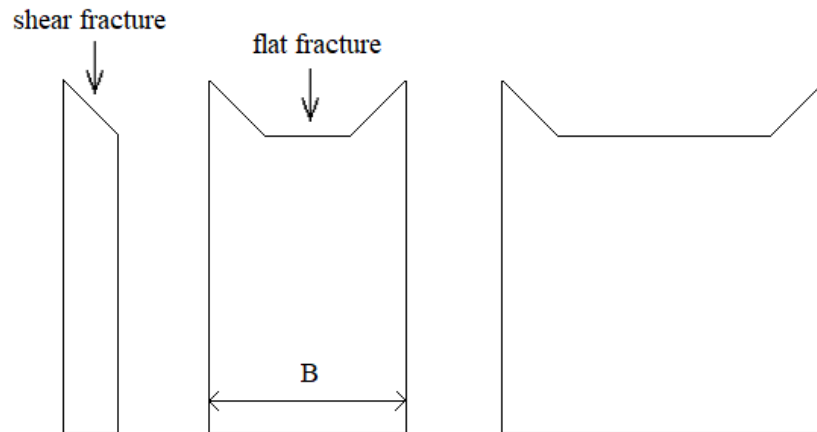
Change of fracture surface morphology for ductile crack growth with increasing specimen thickness, B.
